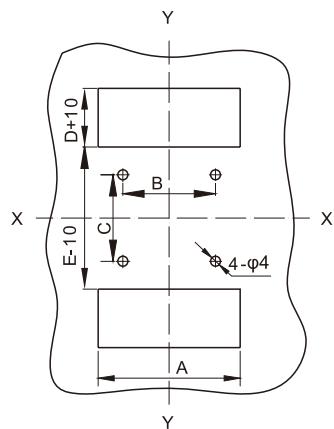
Plug-in front-of-board wiring mounting plate opening dimensions
